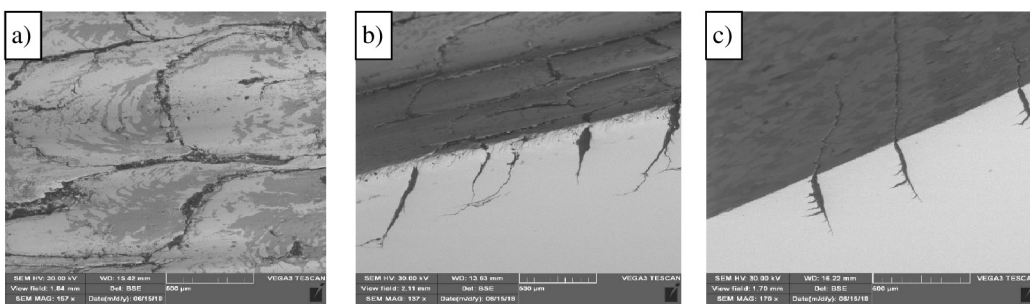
Analysis of zone II for a tool which has produced 1900 forgings
